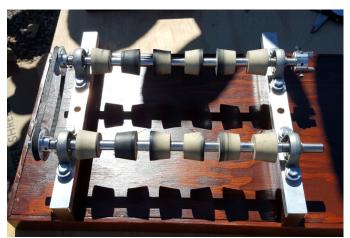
The ball mill, partially assembled. Visible here are the roller shafts fitted with their rubber (stopper) rollers. The shafts ride on four ball-bearings in pillow blocks. To the left are two pulleys and a belt that synchronizes the rotation of both shafts.
